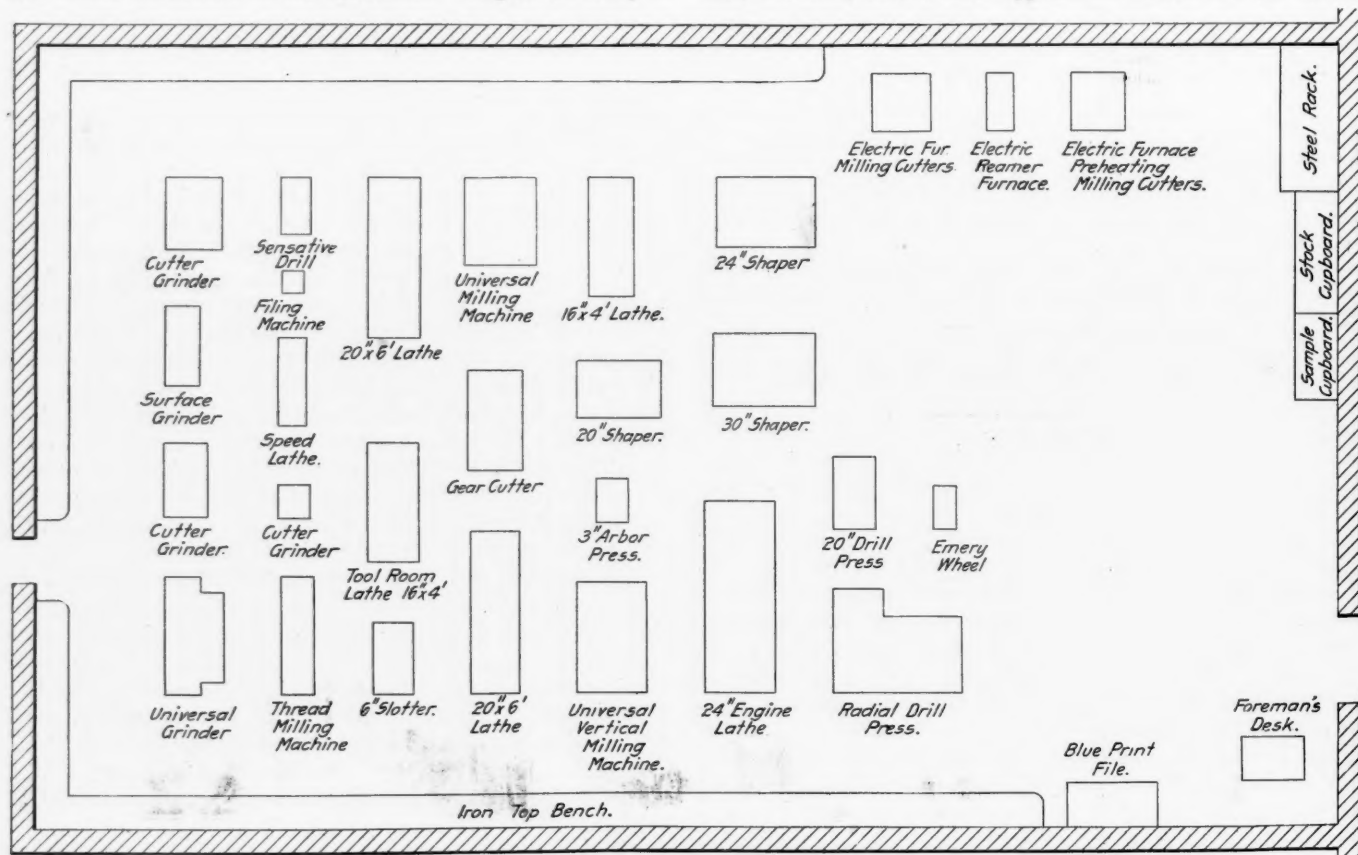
Arrangement of Machine Tools in an Ideal Tool Room.
